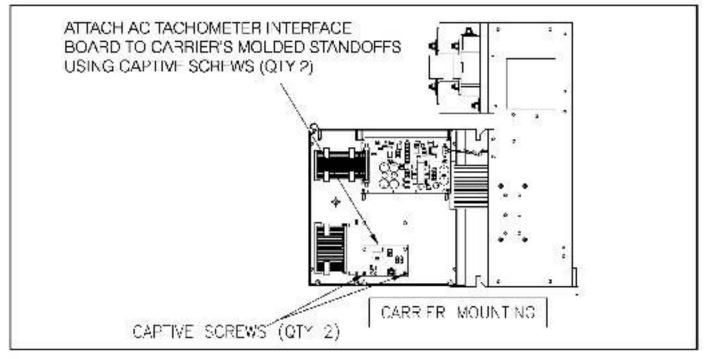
Mounting the AC Tachometer Interface Board on the Carrier
